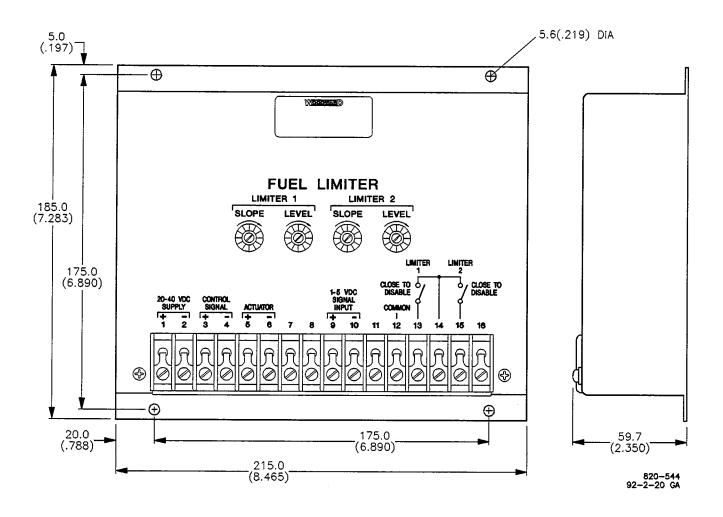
Outline Drawing of Fuel Limiter 8272-789
